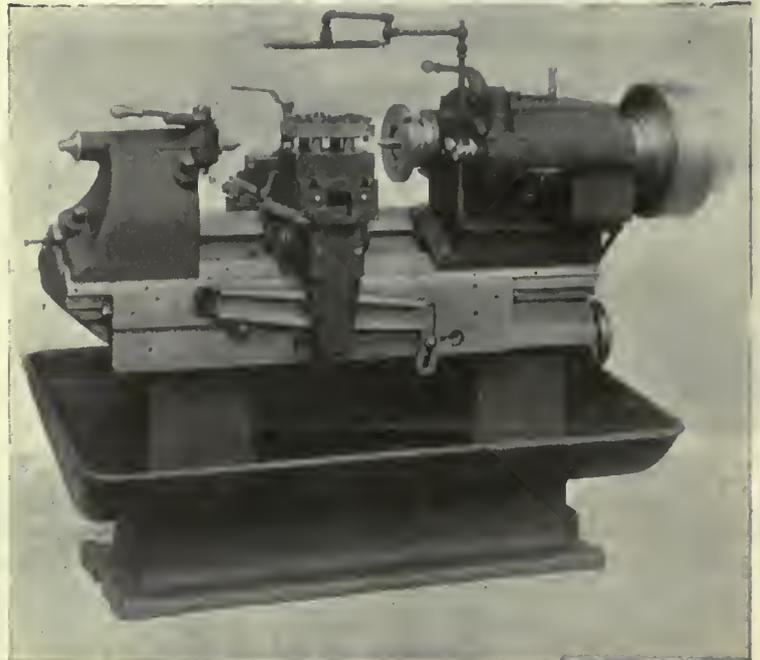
A REAR VIEW SHOWING THE FACING ATTACHMENT.
